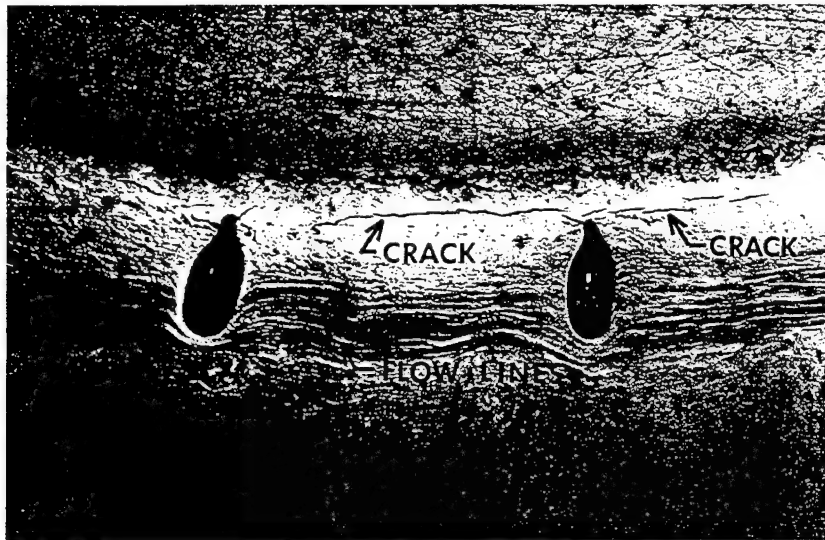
Transverse section of unburned tube showing small cracks near inner diameter edge. Magnification: 12.8X.
